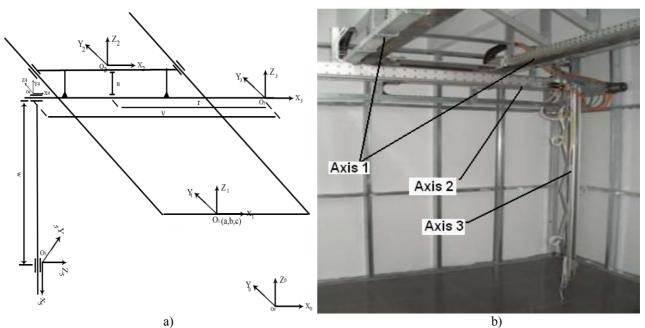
Positioning assembly with 3 translation: (a) Kinematic structure and assembling between units; (b) Practical design
